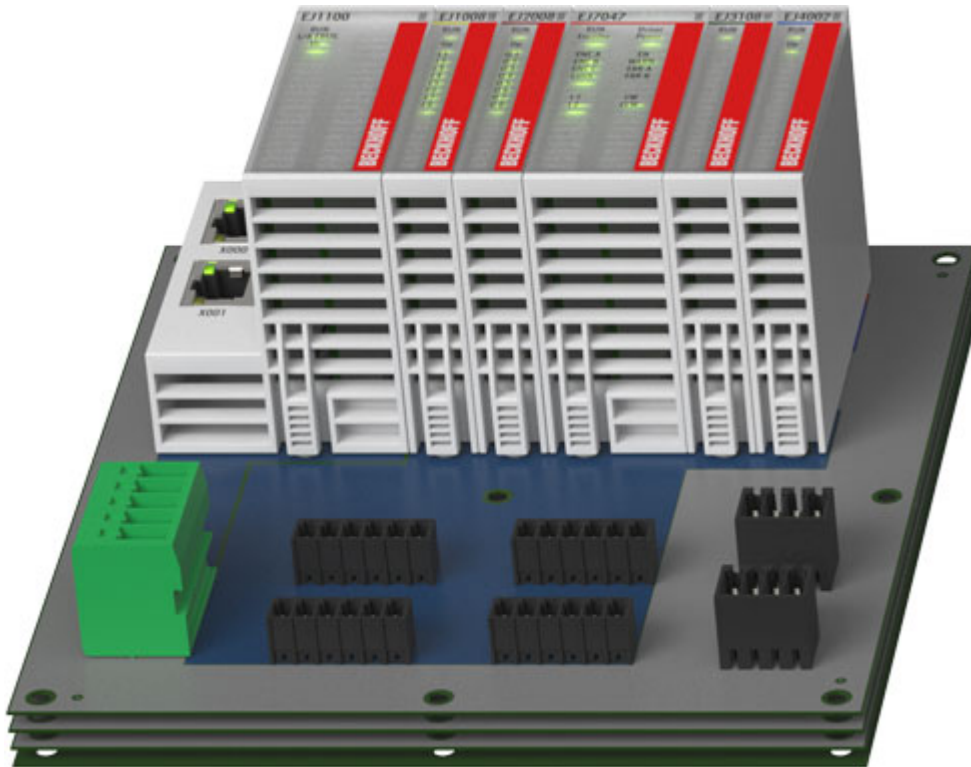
Requirements of the pcb (min. 4 layers, max. 1.6 mm thickness)
